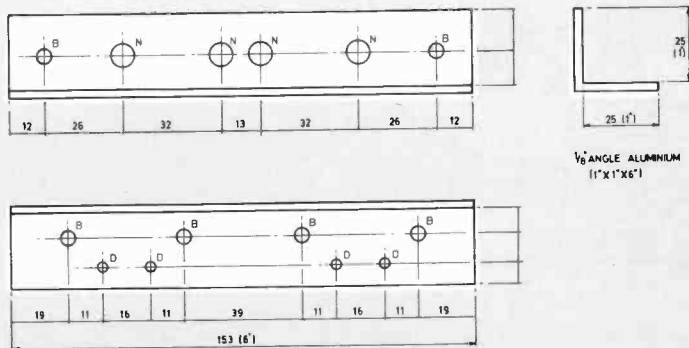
Drilling details for the output transistor heatsink. "N" holes should be drilled using the mounting plate of Fig. 2.5 as a template
